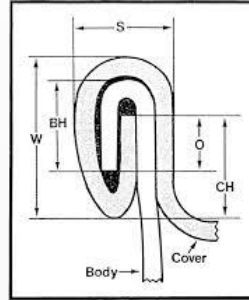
to § 431.2—Micrometer Measurement of Cylindrical Containers
